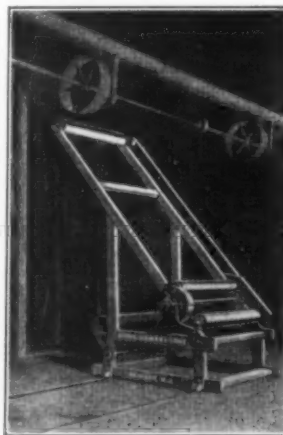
DOUBLE TEXTURE FABRIC FESTOONING MACHINE.
